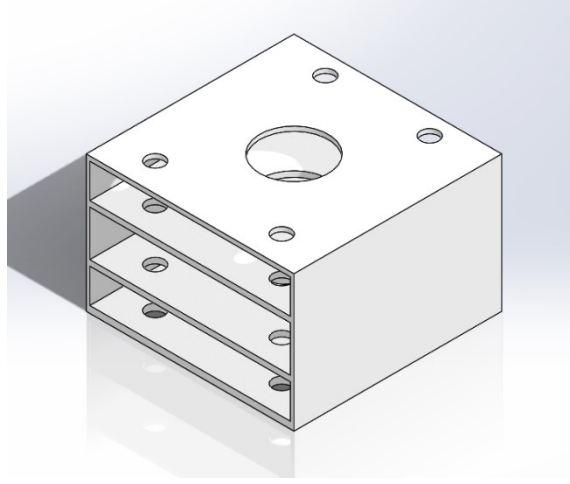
Electronic Shelf with Rod Accessible Mounting Holes.
